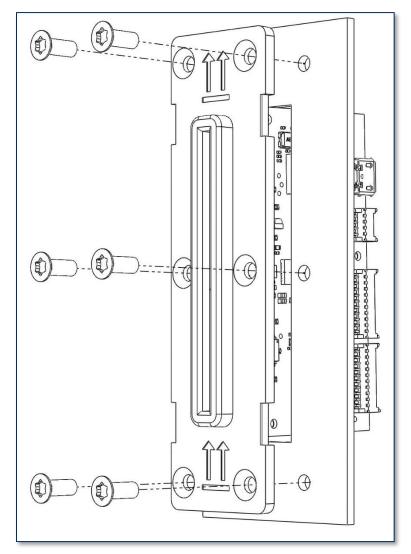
mDynamo Weatherized Mounting: Front View
